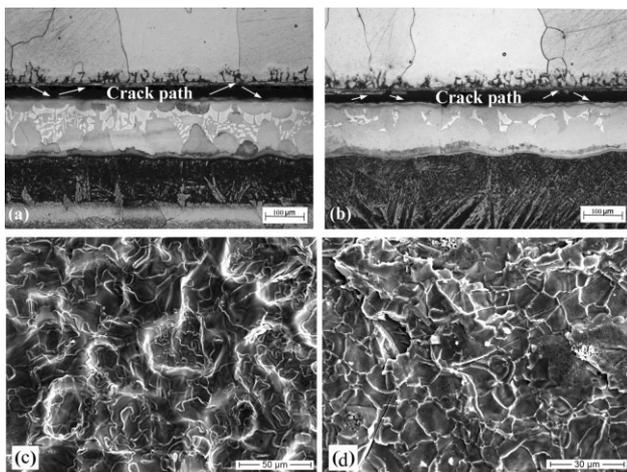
Cross section of fracture surface and fracture morphology: (a) and (b) Fracture surfaces for the joint brazed at a temperature of 870 and 910 °C respectively; (c) and (d) Fracture morphologies for the joint brazed at a temperature of 870 and 910 °C, respectively.
